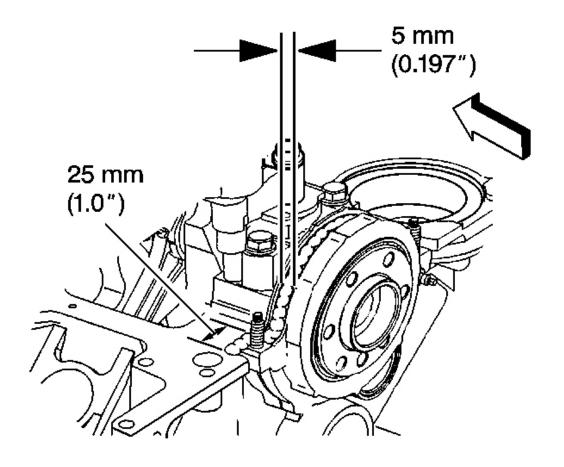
Applying Adhesive To Entire Length Of Rear Oil Seal Housing To Engine Block Junction At Oil Pan Sealing Surfaces
